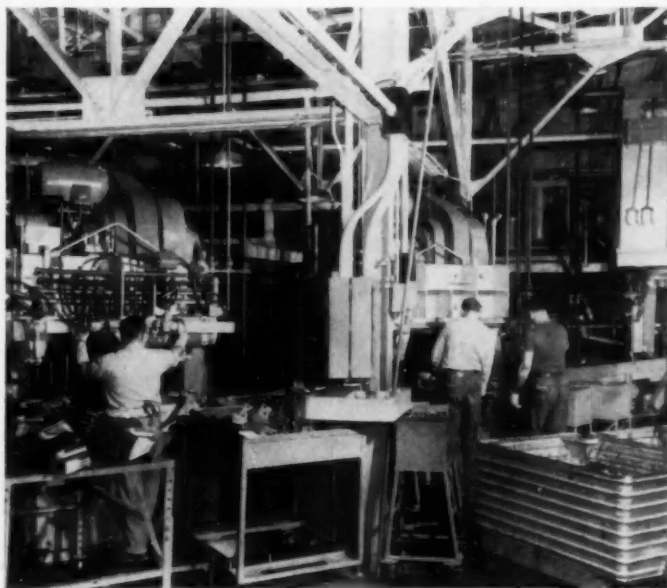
Three presses that spot weld hinge reinforcements to a pillar, spot weld two hinge anchor plates and a hinge pillar sub-assembly to a door inner panel.
